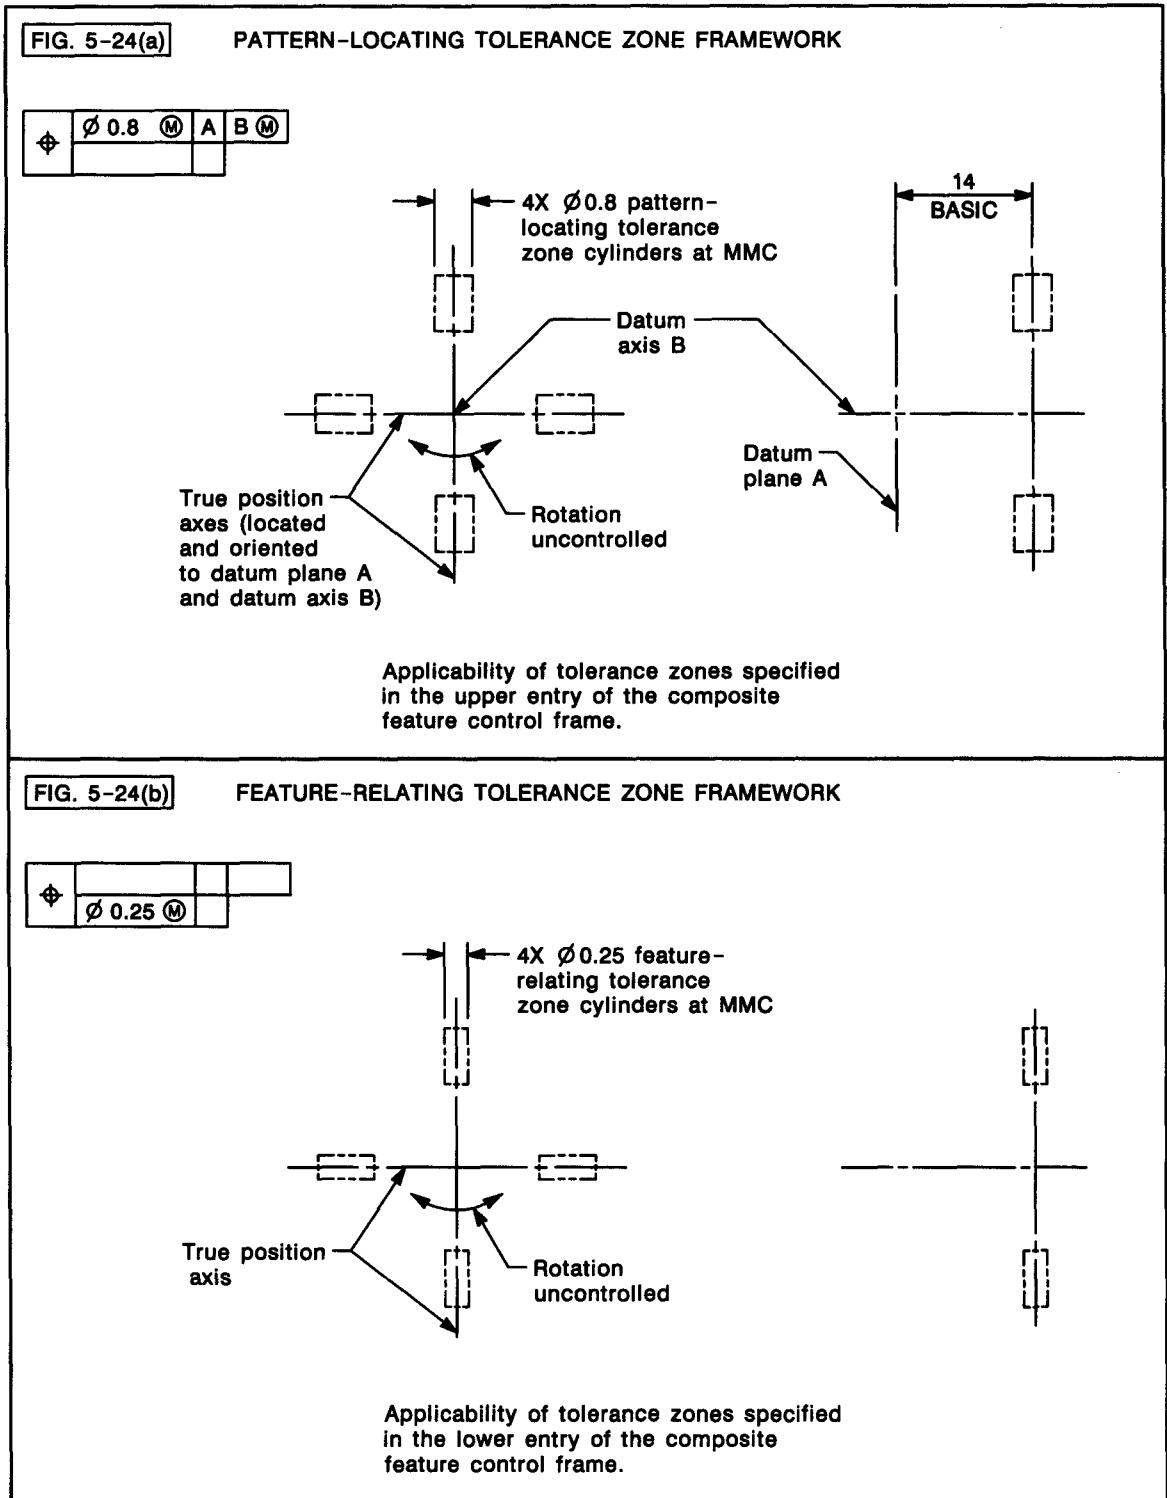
RADIAL HOLE PATTERN LOCATED BY COMPOSITE POSITIONAL TOLERANCING
